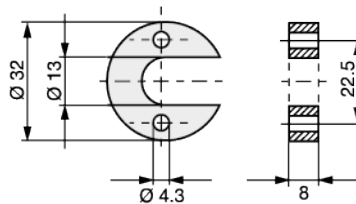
Installation dimensions of BTL-P-1013-4S position magnet
